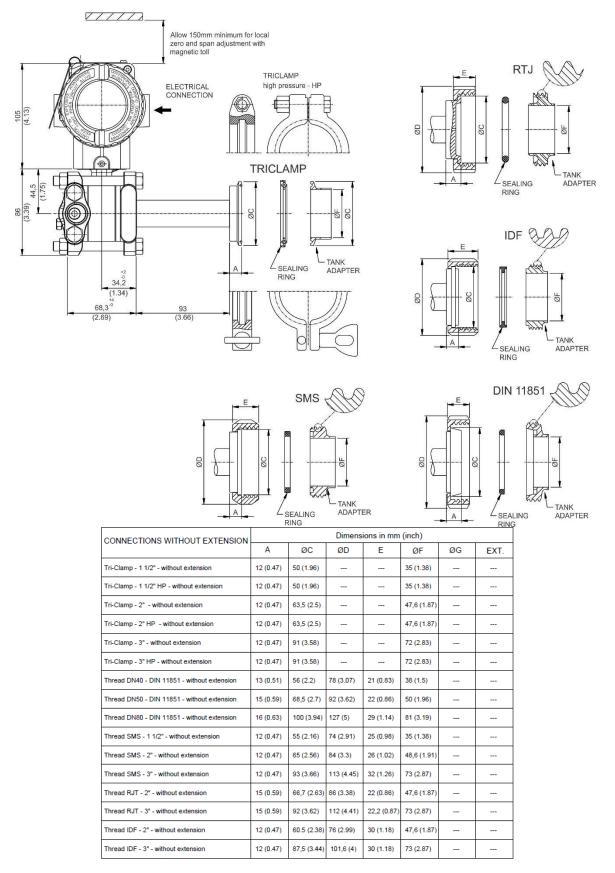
(e) – Dimensional Drawing and Mounting Position for the LD400 HART<sup>®</sup> – Sanitary Transmitter without Extension
